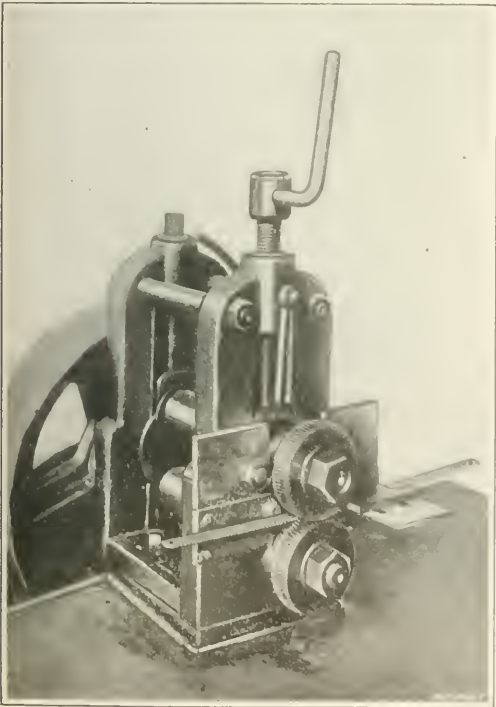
Close View of Setting Rolls on Machine used for setting Teeth of Hacksaw Blades
